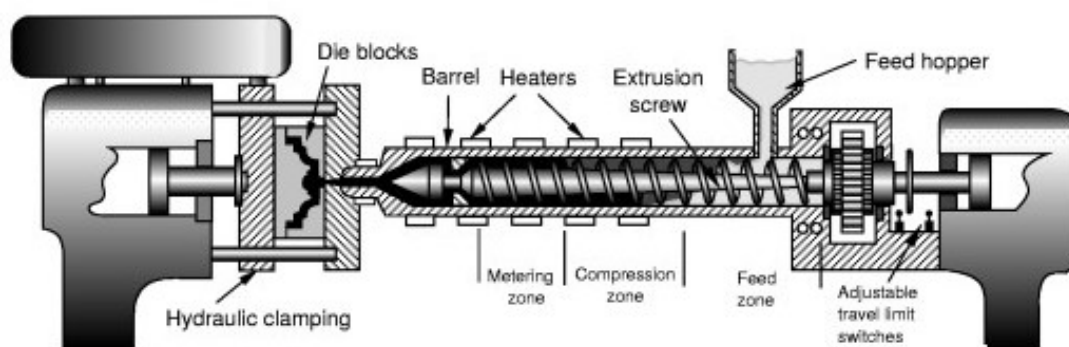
Injection molding process. Adapted from: (Swift and Booker, 2003)
